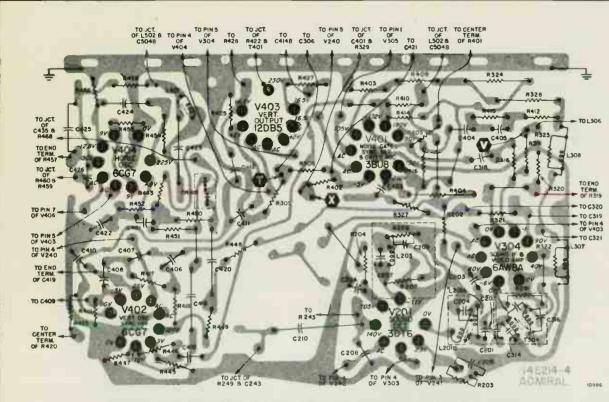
View of Printed Wiring Side of Main Board A5780-4 Used in 16U1C, 16AU1C, 16W1C and 16AW1C Chassis. Gray area represents printed wiring; black symbols and lines represent components and connections on opposite side.
